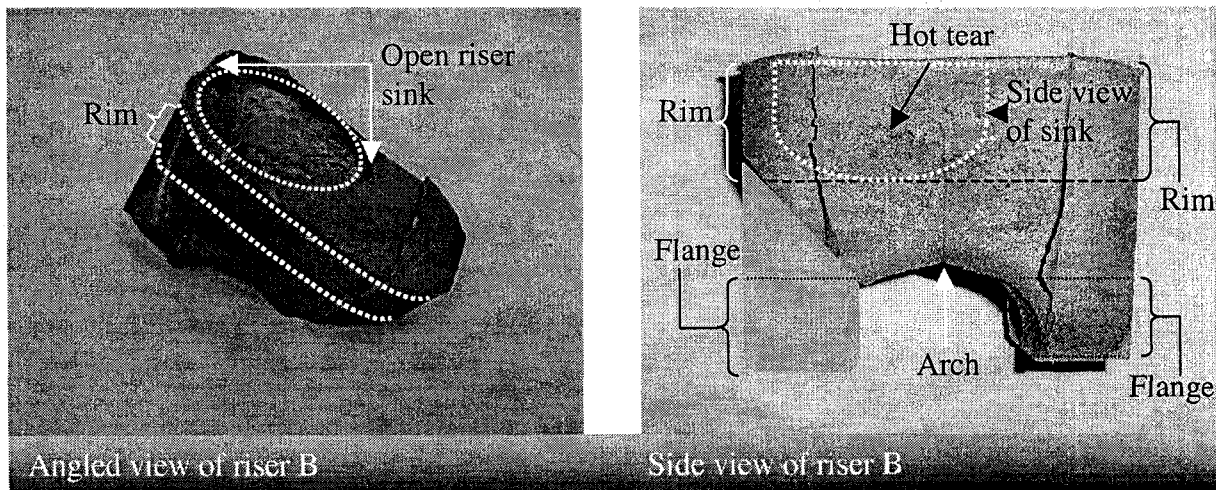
Pictograph of an angle view and side view of riser B from a W319 V8 engine block illustrating the rim, flanging, arch and riser sink.
